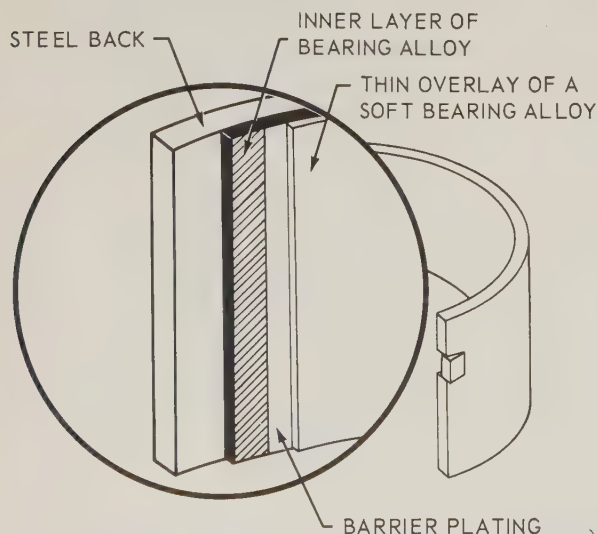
Construction of a bearing half of the sleeve type. The softer bearing material is applied to a hard back. (Federal-Mogul Corporation).
